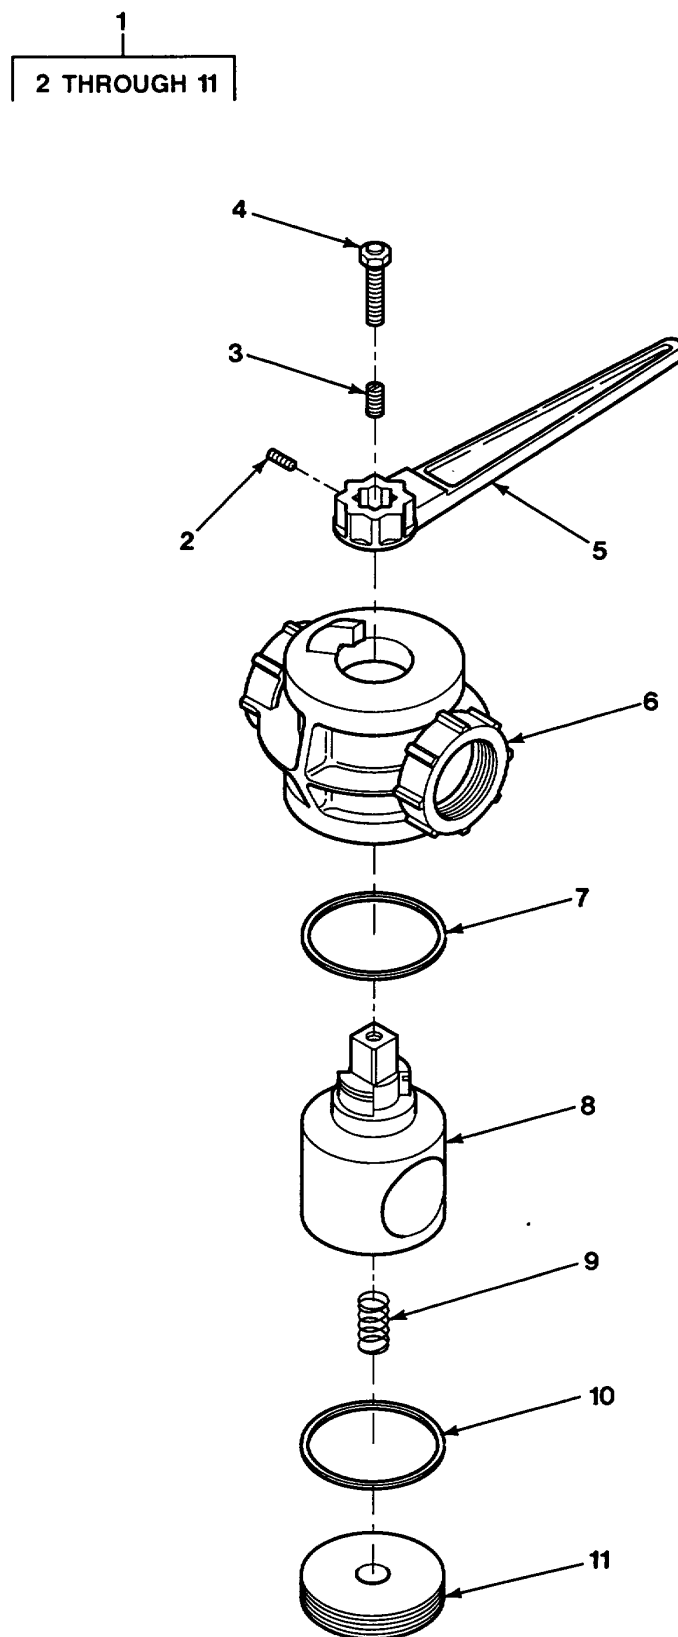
THREE QUARTER INCH VALVE ASSEMBLY
